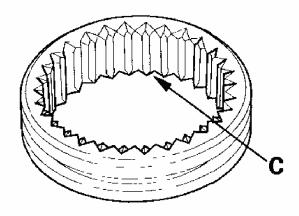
Inspecting Inside Of Each Synchro Ring Courtesy of AMERICAN HONDA MOTOR CO., INC.
